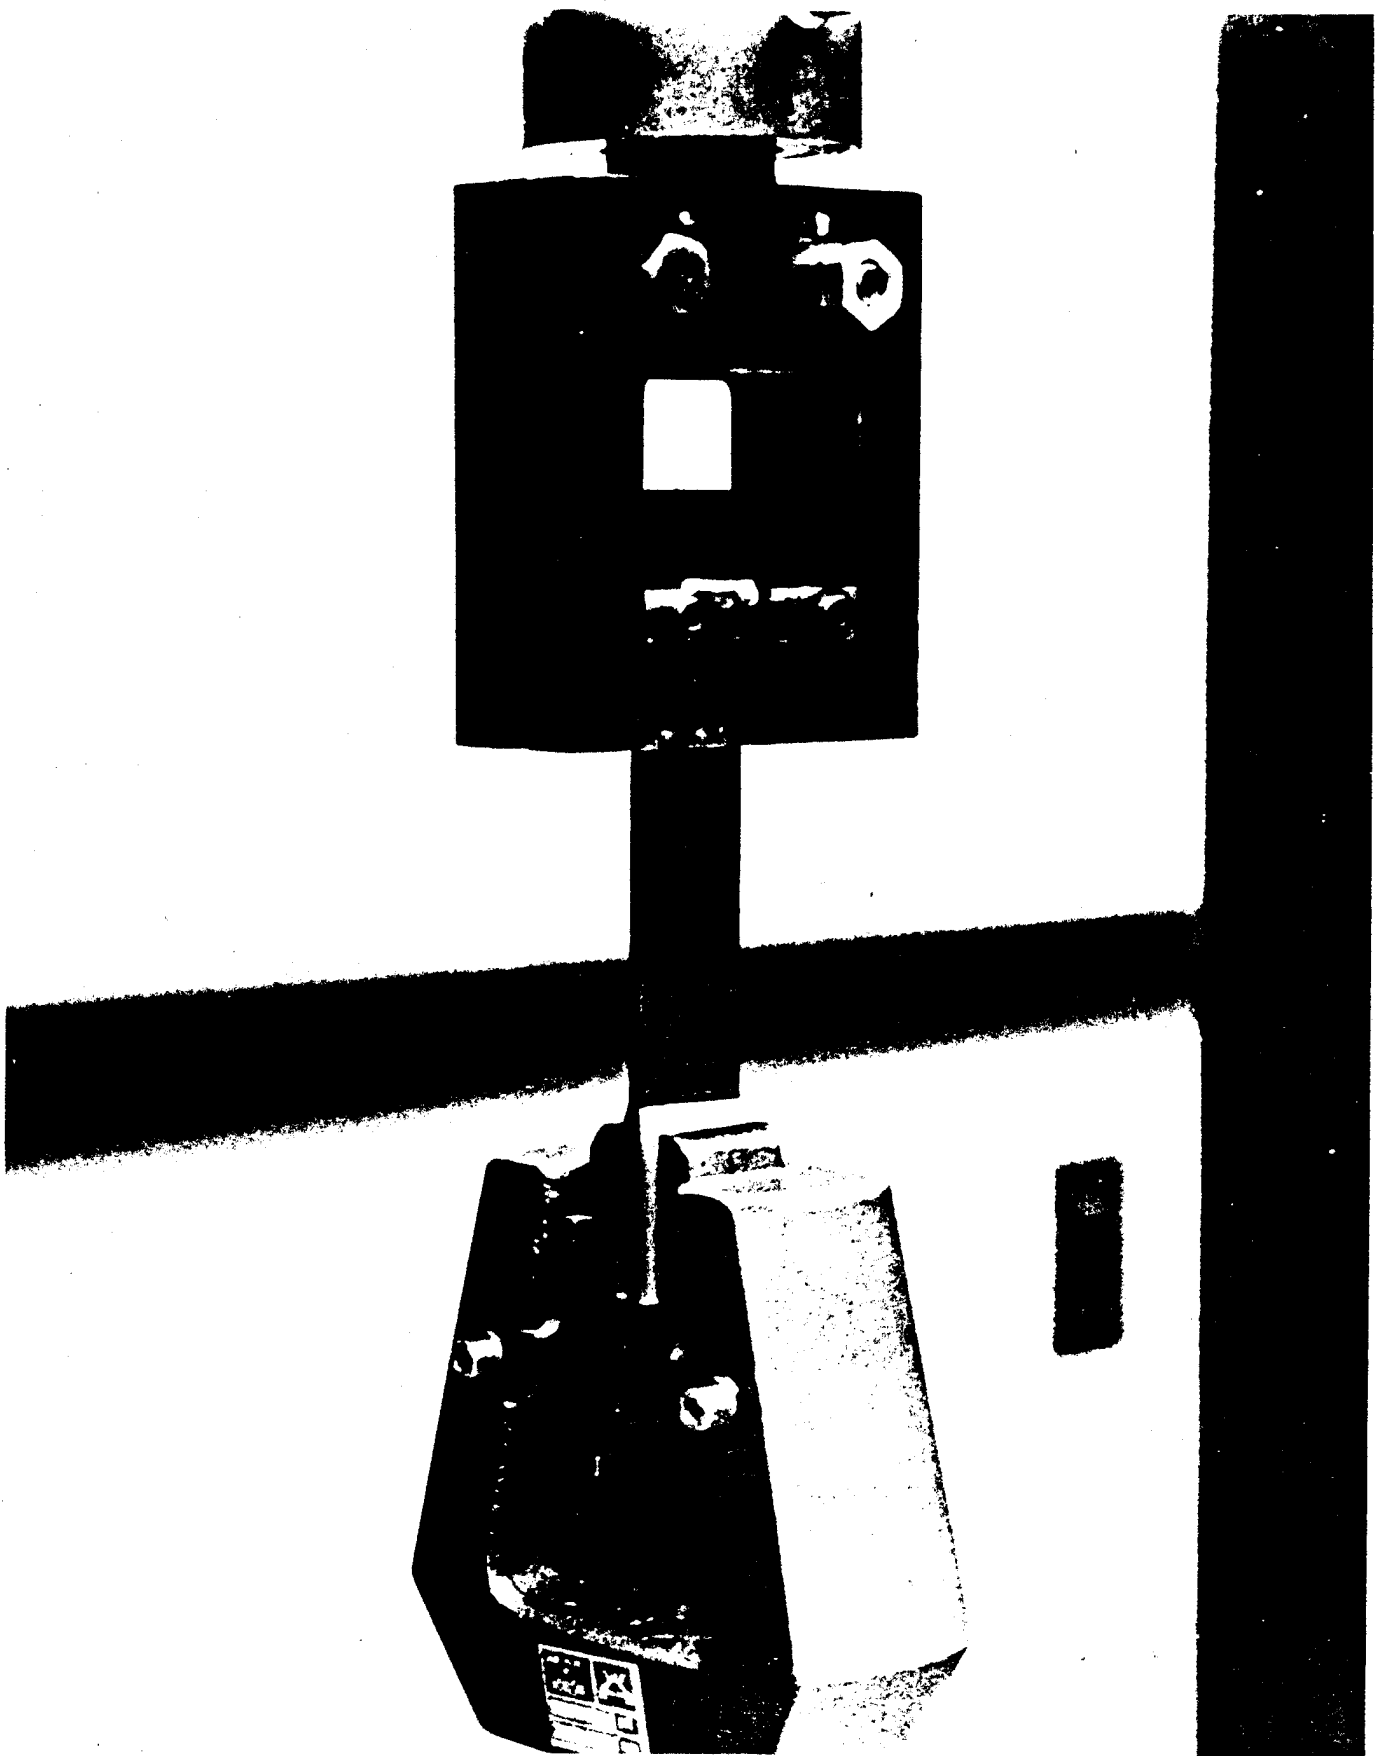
BOLTED JOINT CLEVIS FIXTURE
